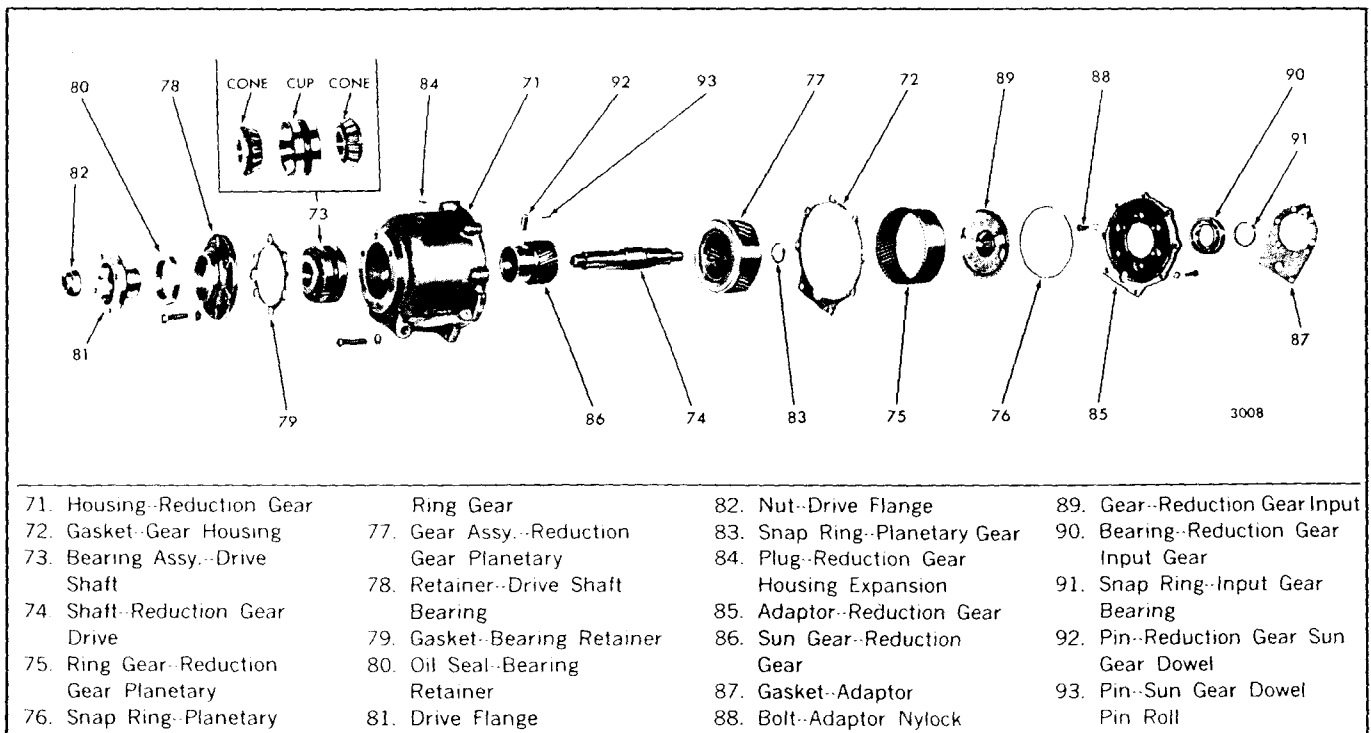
Reduction Gear Details and Relative Location of Parts (1.5:1 Ratio)
